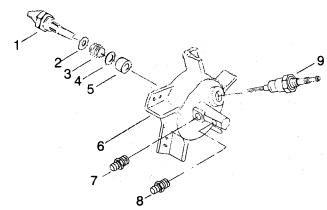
Replacement Parts Illustration for Burner Head Assembly Model F110E
